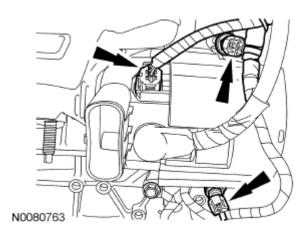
Locating Generator Electrical Connection And Wiring Harness Retainers Courtesy of FORD MOTOR CO.
